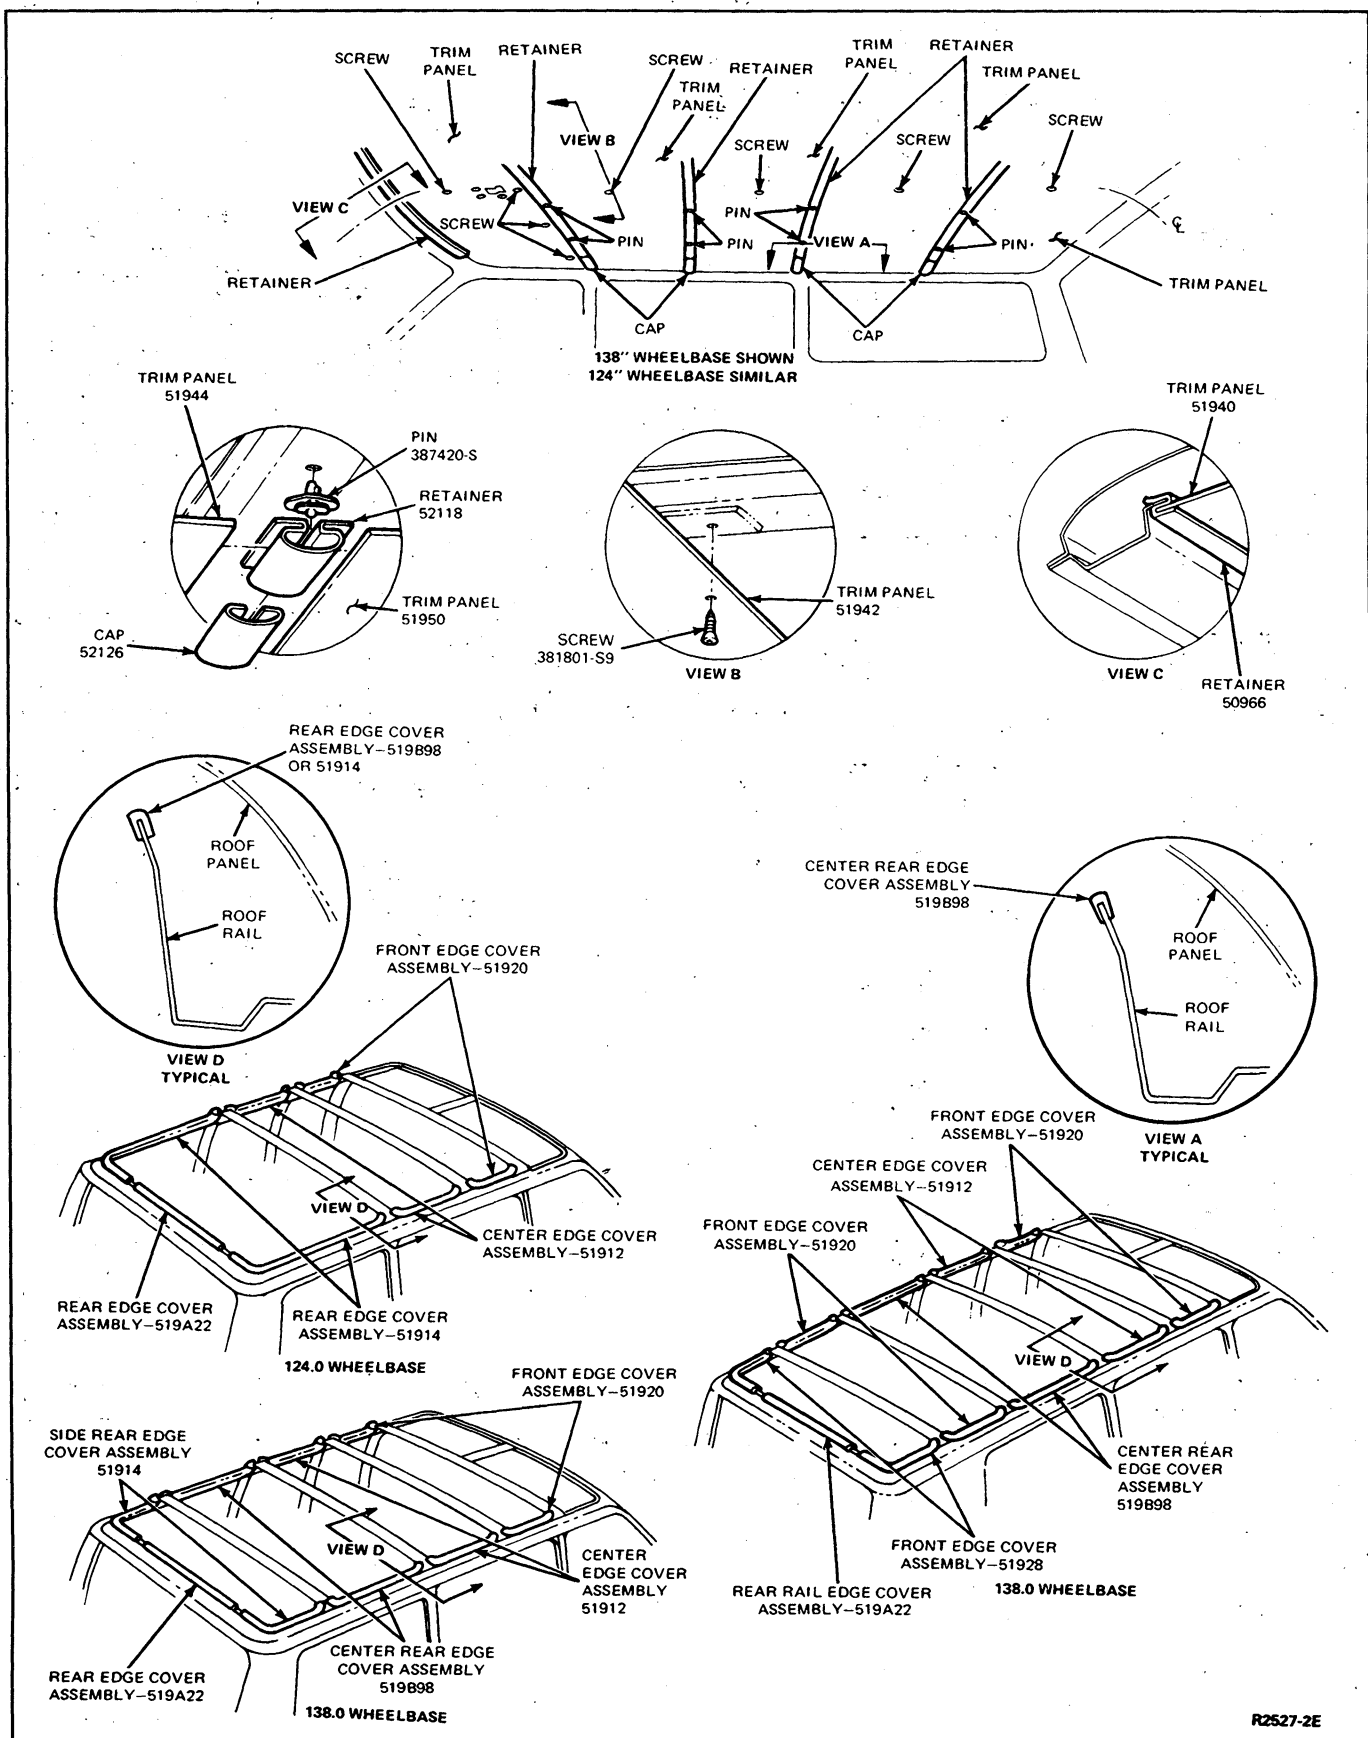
Roof Trim Panels—E-150—E-350—124 inch and 138 inch Wheel Base Shown—Others Typical
